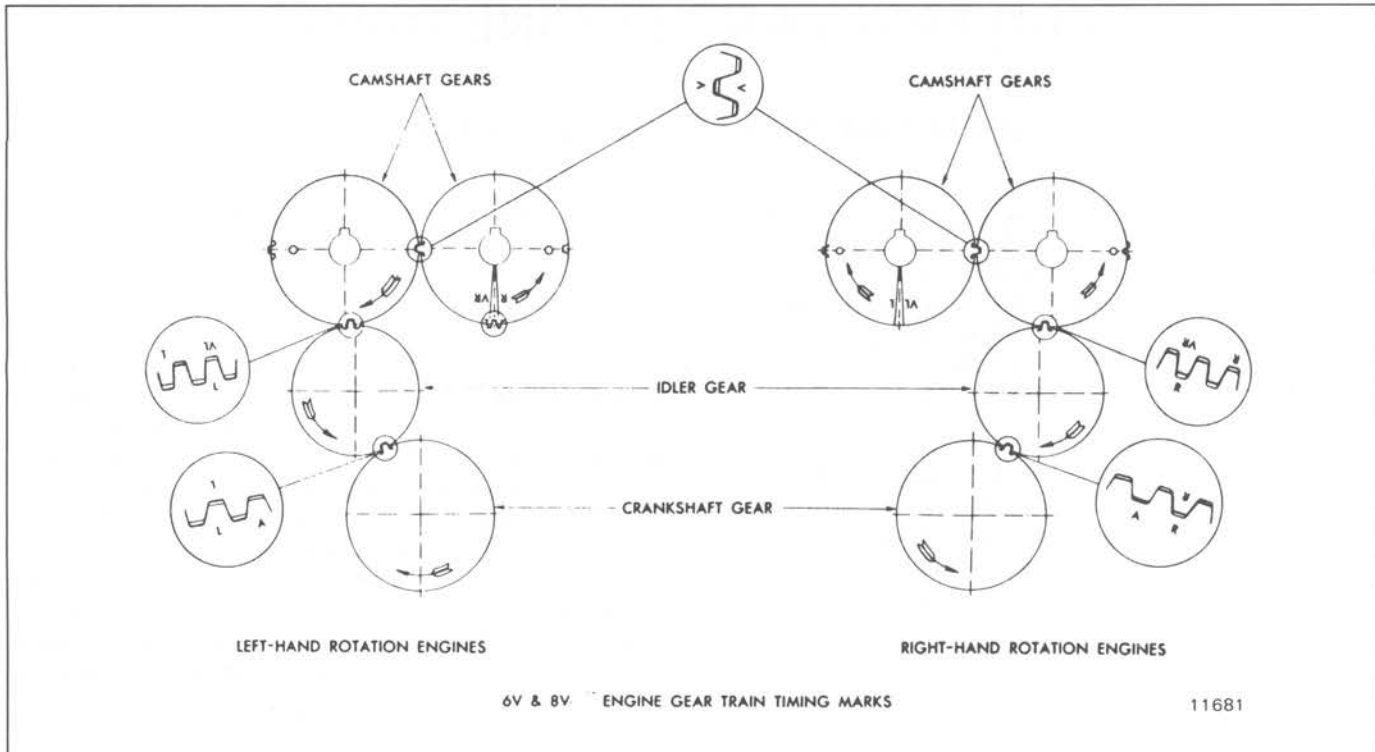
Gear Train and Timing Marks for 6V and 8V Engines
